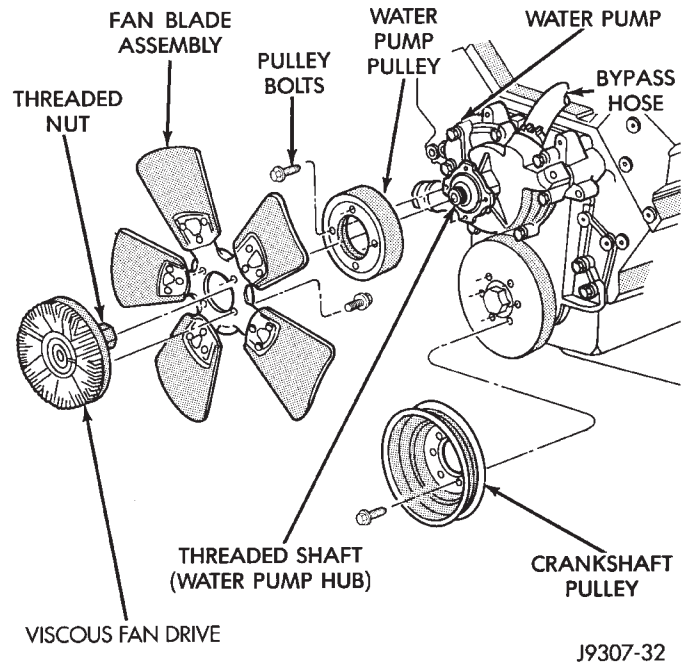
Fan Blade/Viscous Fan Drive—3.9L/5.2L/5.9L Engine
